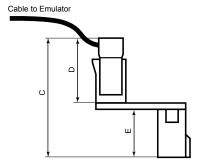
The dimensions of the ADA-JET-ARM20 probe. Side view. C = 22.7 mm (0.88 in.) D = 15.0 mm(0.59 in.) E = 11.0 mm (0.43 in.)
